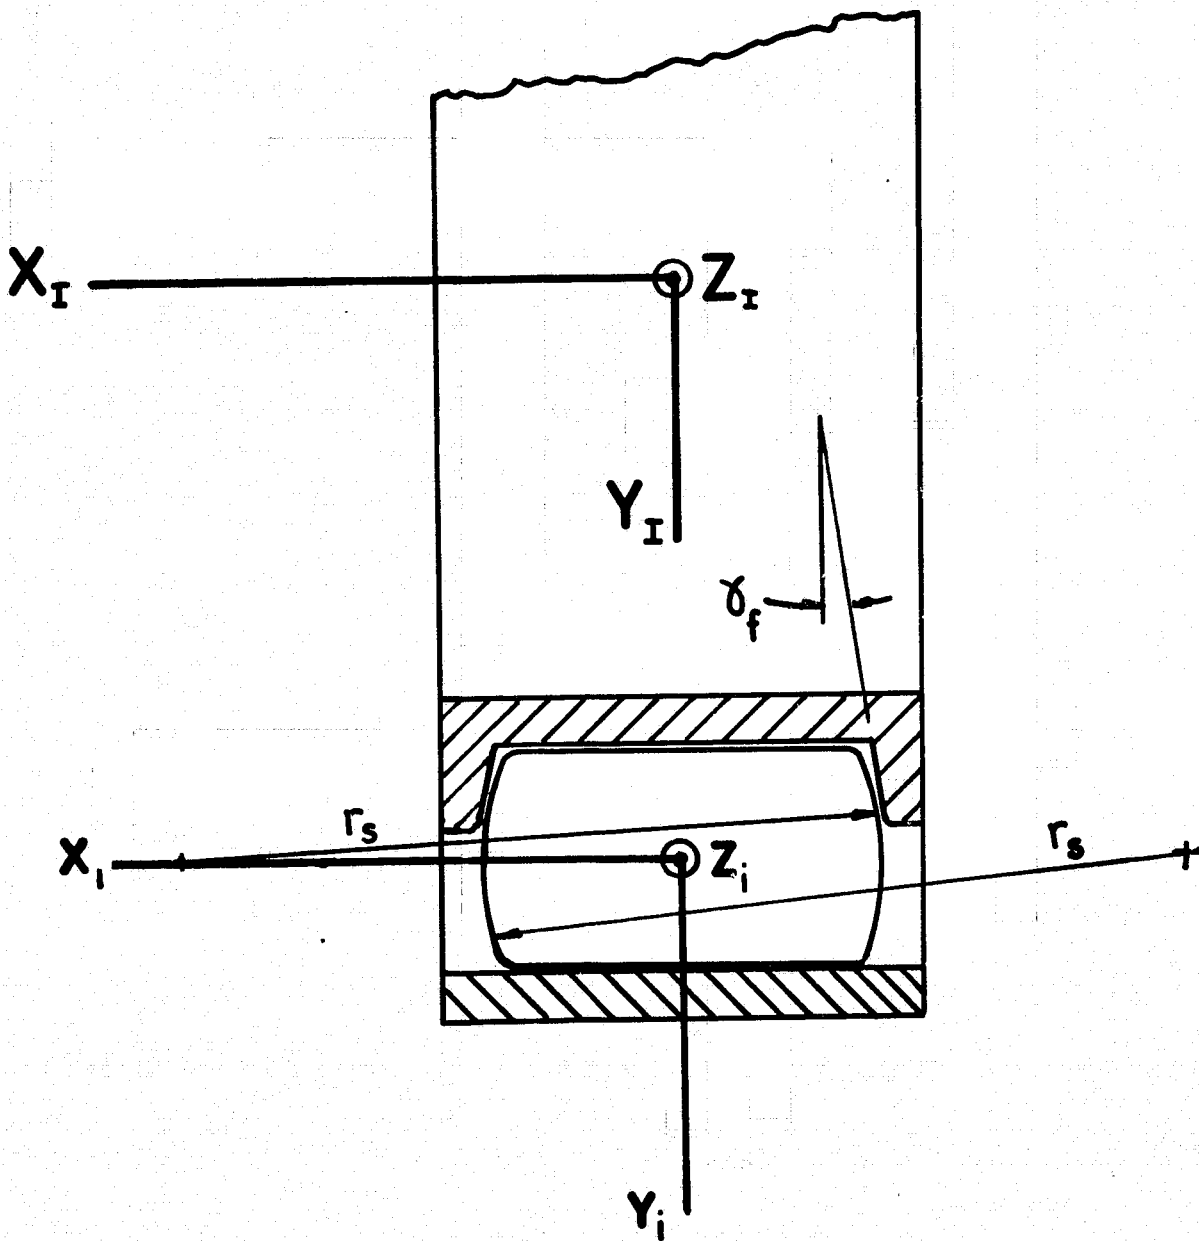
CROSS SECTION THROUGH A CYLINDRICAL ROLLER BEARING HAVING A FLANGED INNER RING.
